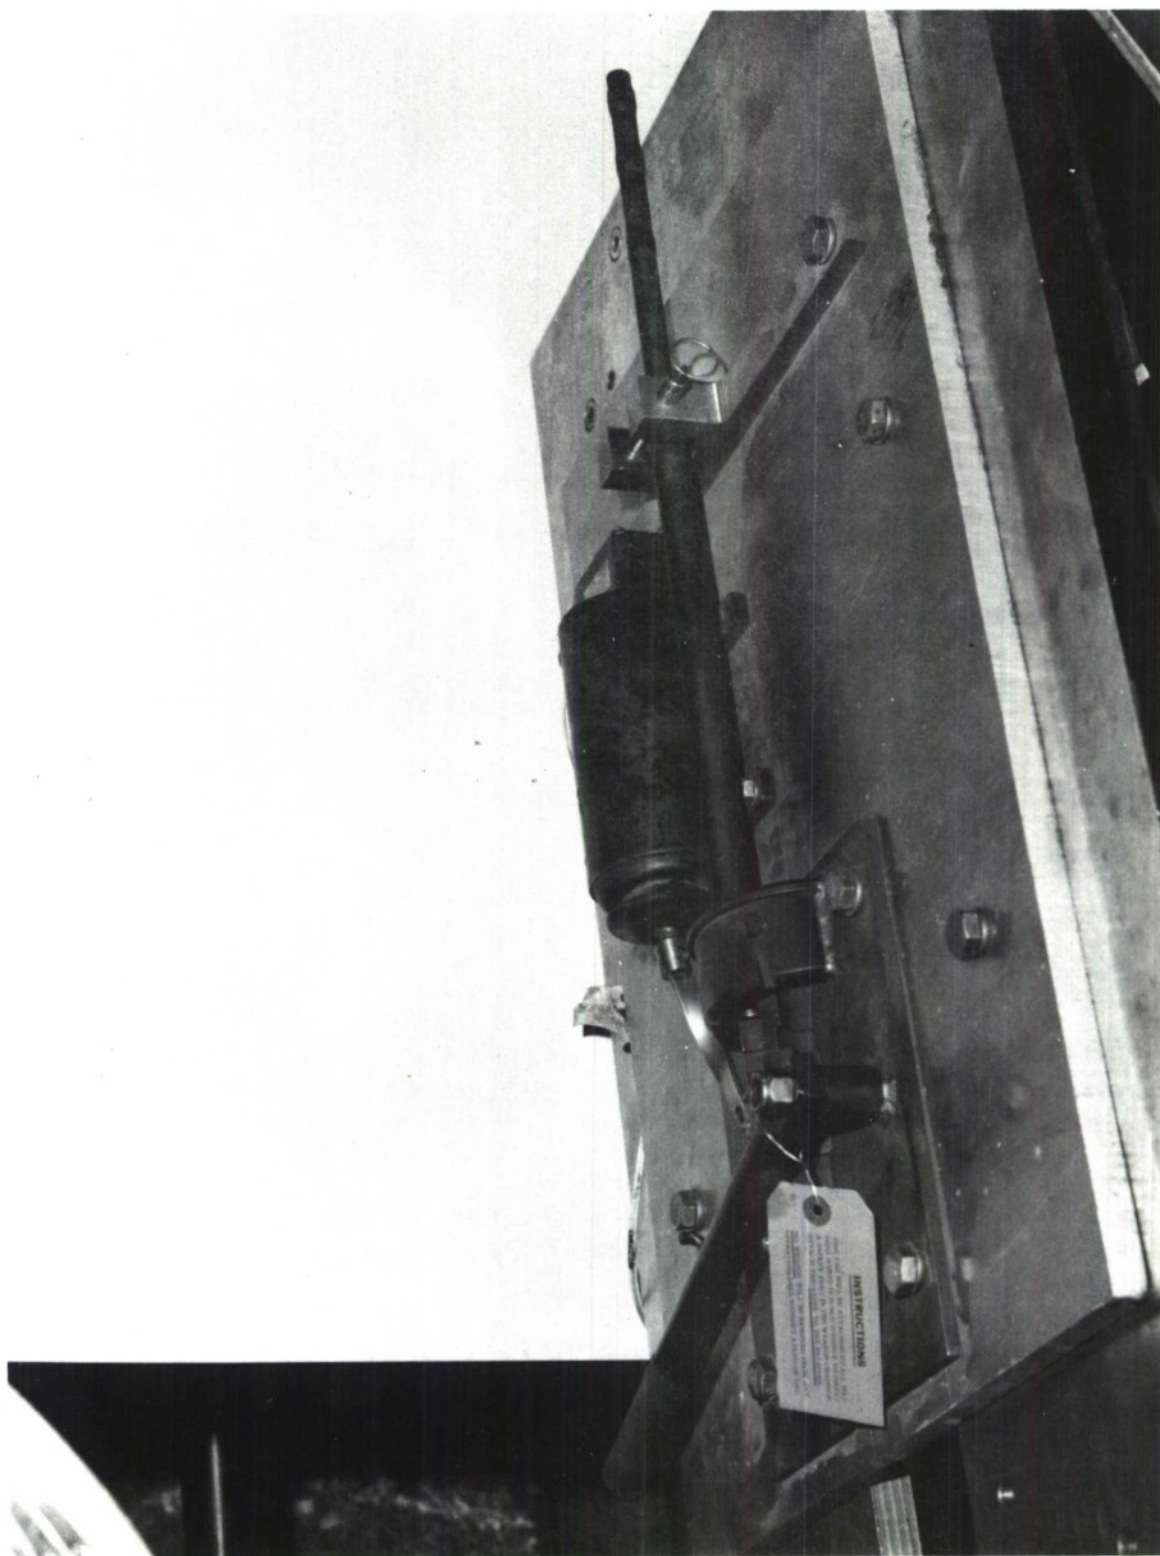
, TEST FIXTURE FOR SINGLE BARRELS
